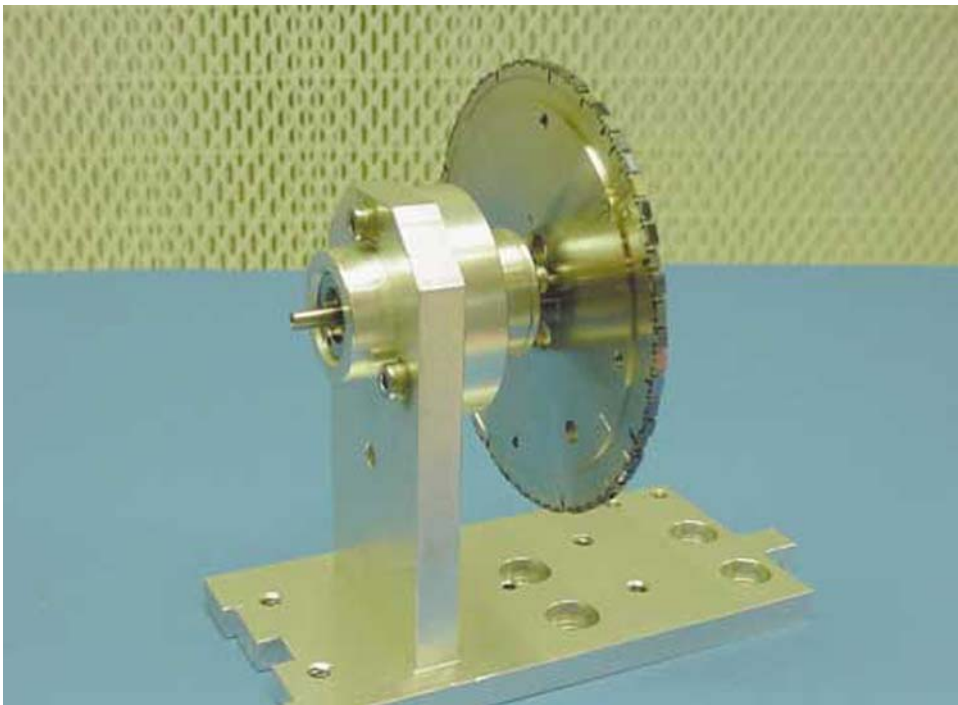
The dust collector wheel, with 64 mounted facets. The wheel is 60 mm in diameter.
